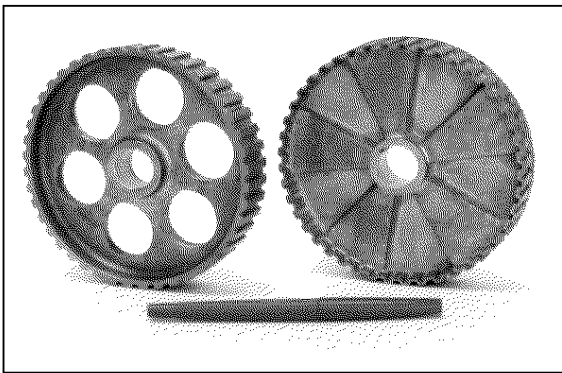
The prototype sprocket (left) was cast in a plaster mold from a master modeled from the original iron part. After gravity casting, teeth were machined. When tests verified the durability of the teeth, the sprocket at right, optimized for die casting, was die cast to tolerance in the final zinc-aluminum alloy.
